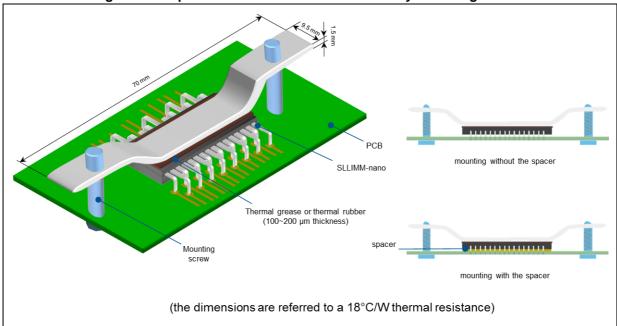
Al-plate heatsink bonded on the PCB by mounting screws
